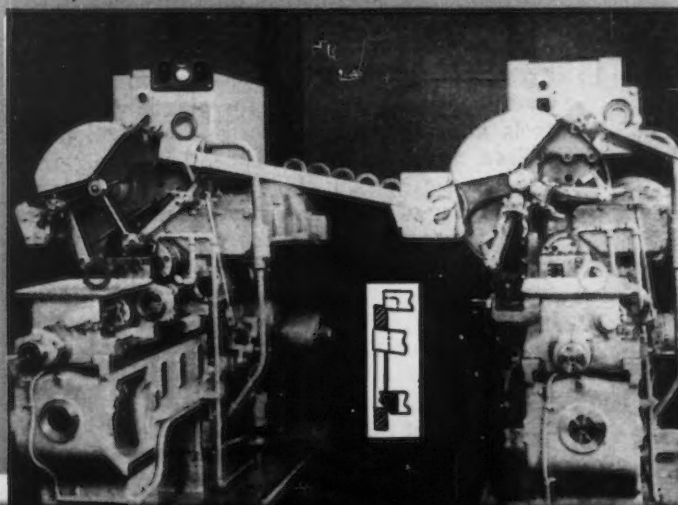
Thrust bearing races are machined on both sides in this double lathe setup, using two 8-in. Fay's. The parts are loaded in the hopper of the machine at left and proceed through both machines by an automatic handling device. The first operation is shown in the inset at left and the second operation in the inset at right.
